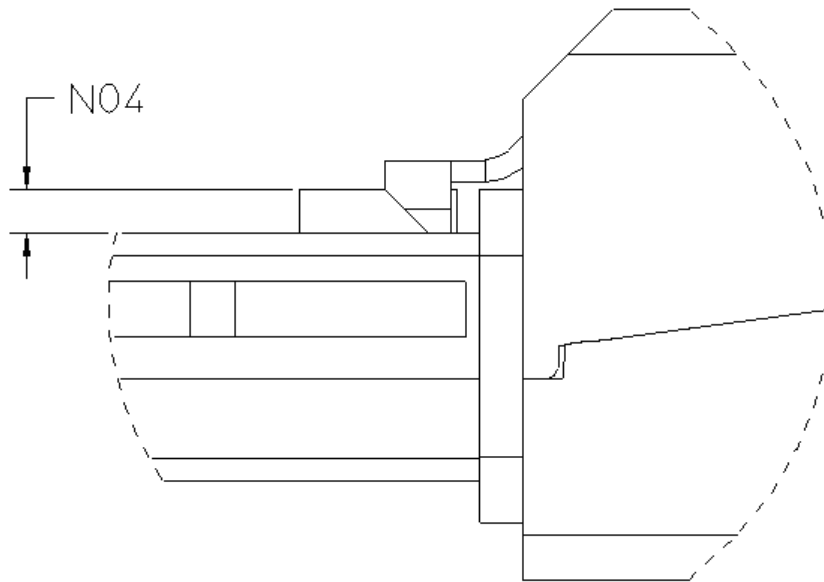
PLUG BLOCKING KEY DIMENSIONS - SIDE VIEW
